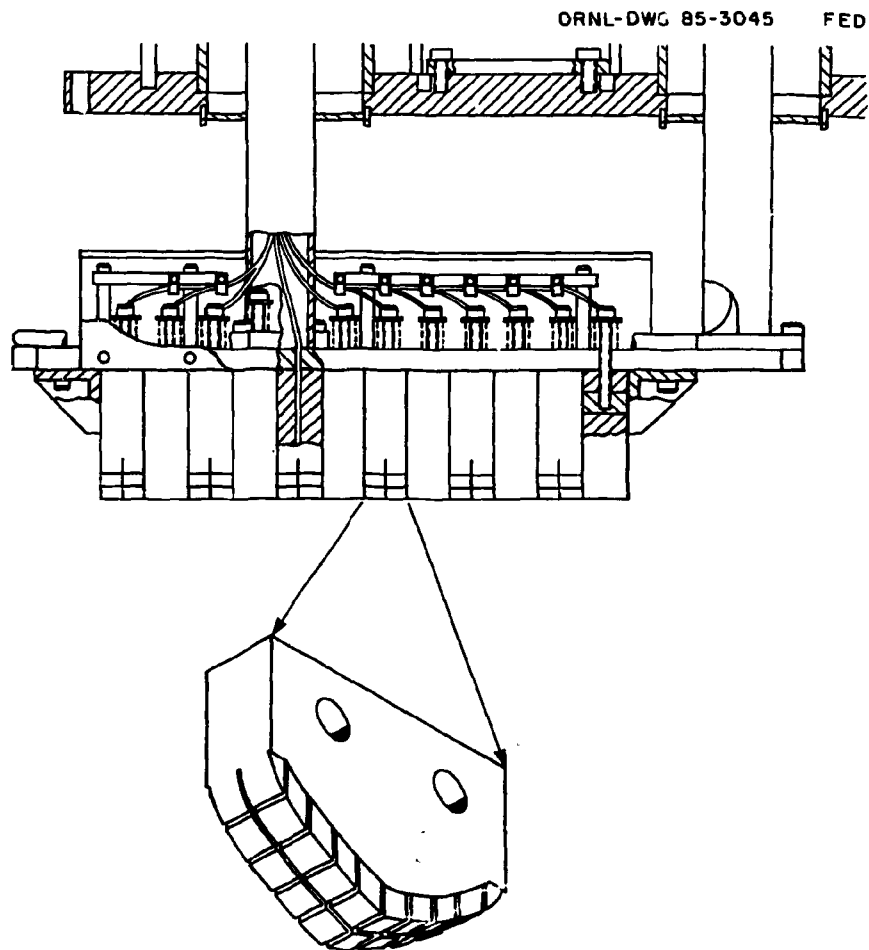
The Be limiter assembly. The radioactive tile is shown pulled out and rotated to illustrate the tessellated construction. The tessellations were produced by cutting slots ~ 1 cm apart in the front surface. The large major radius side is to the right.
